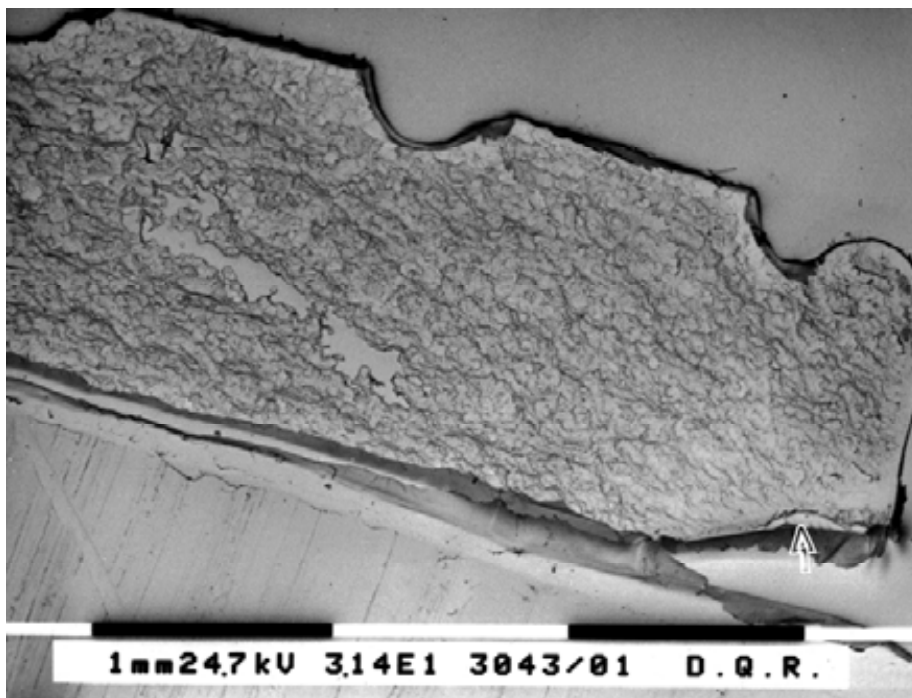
Bioden replica of the fracture surface of the failed rod
